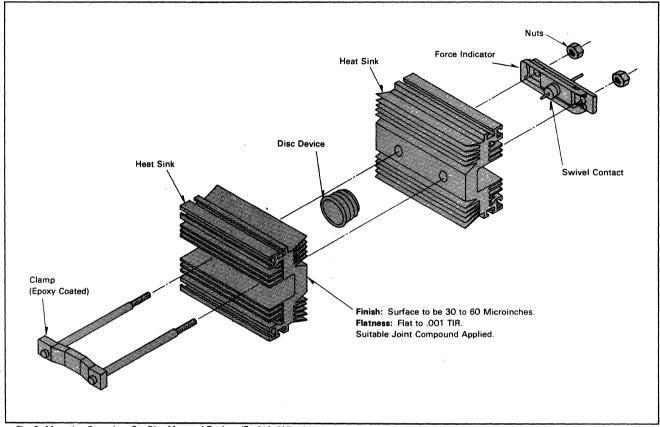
Mounting Procedure For Disc Mounted Devices (Exploded View).
